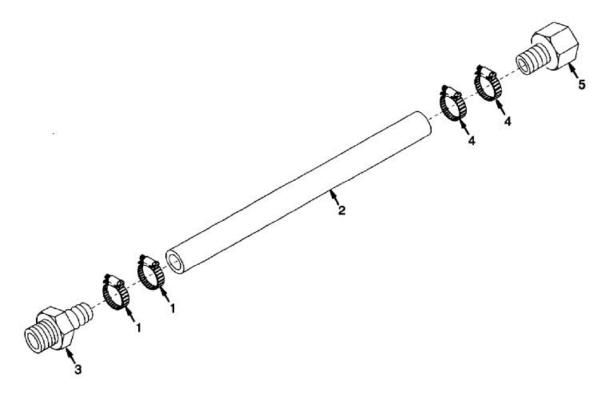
Typical Supply Pump Cold Line Hose Assembly
